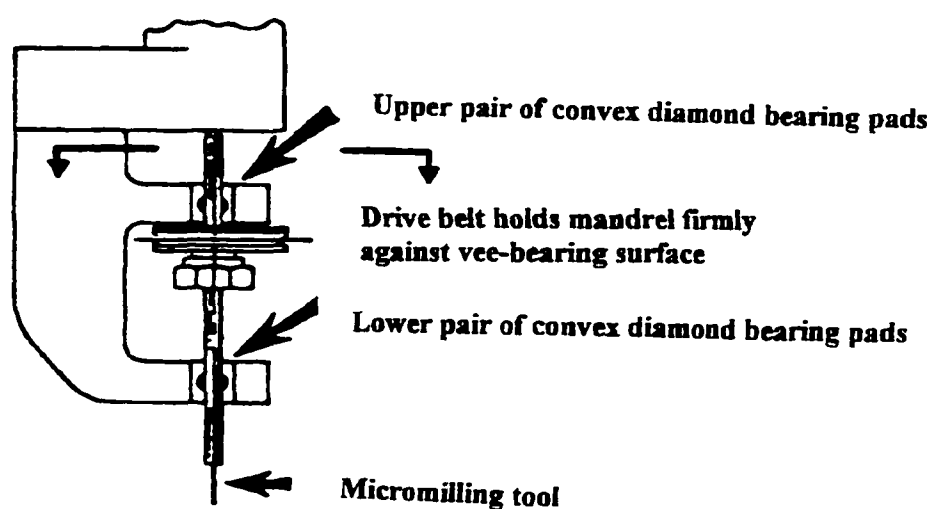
Vee-block arrangement for holding milling tools with extreme concentricity (Courtesy National Jet Company).
